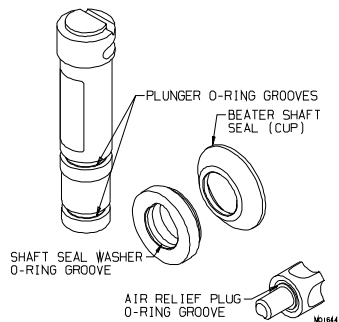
Clean shaft seal and plunger o-ring grooves
